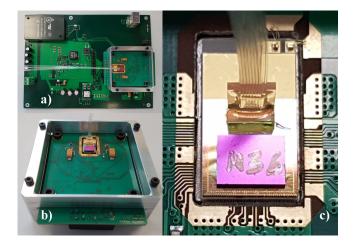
(a) Whole assembly on host board; (b) Module board inside the Aluminum package; (c) Detailed view of the TEC and the 3D PIC-EIC sub-assembly wire bonded to the module board and pigtailed with a fiber array.
